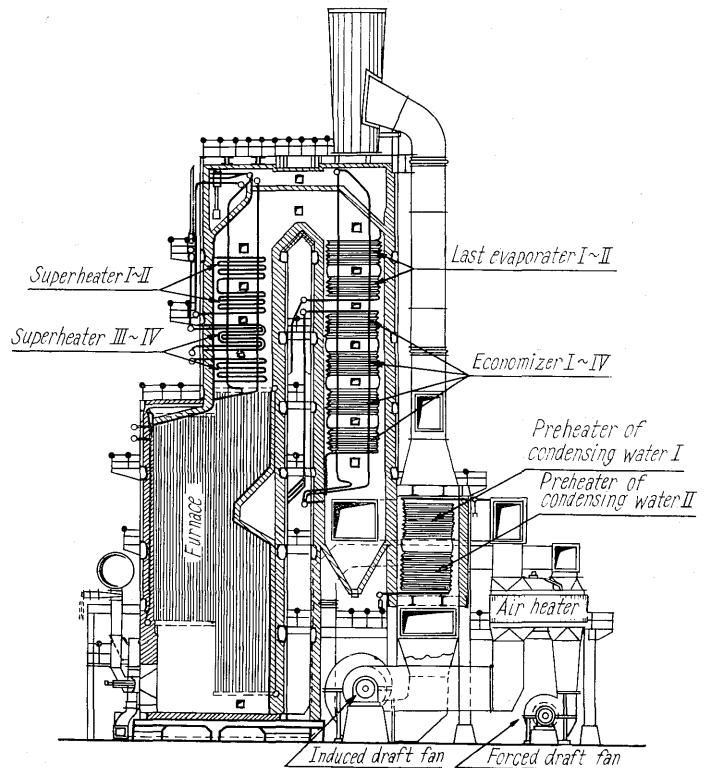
Sectional diagram 130 t/hr Benson boiler for Nadahama Factory, Kobe Steel Works Ltd.
